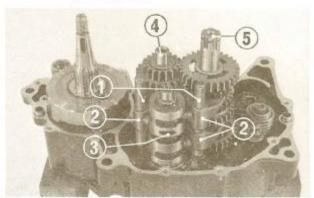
(1) Shift fork shaft (2) Shift fork
